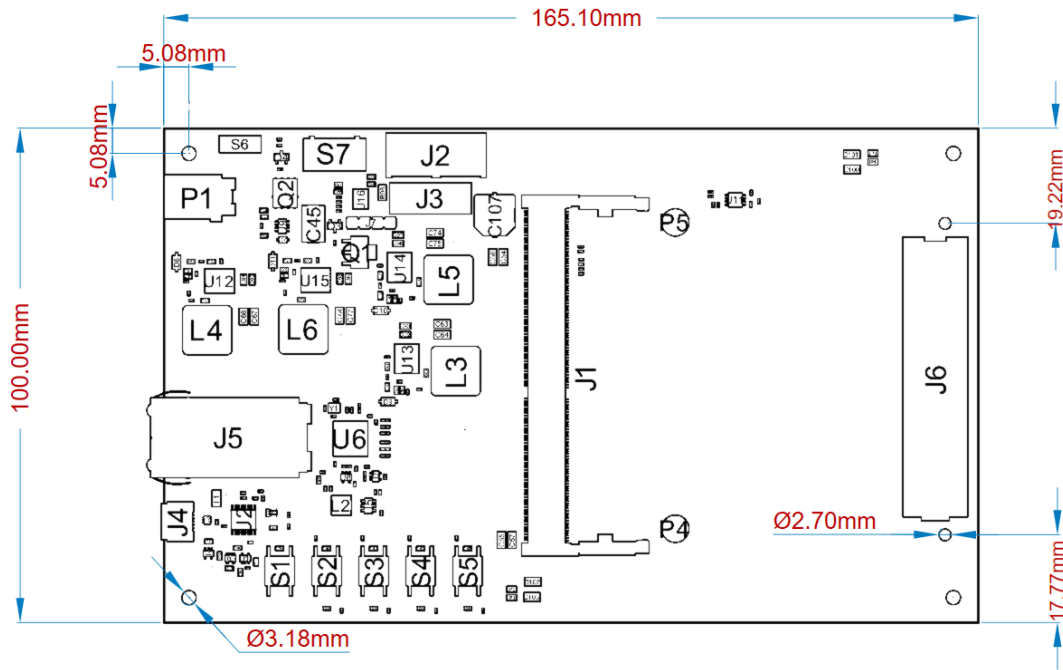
MitySOM-C10L Development Kit Outline, Mounting Hole Locations
